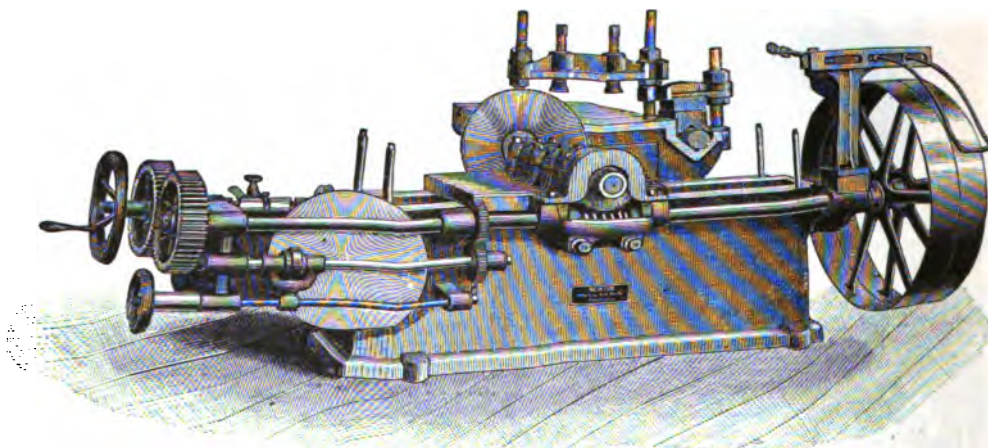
Cold saw cutting-off machine for bars and beams.
